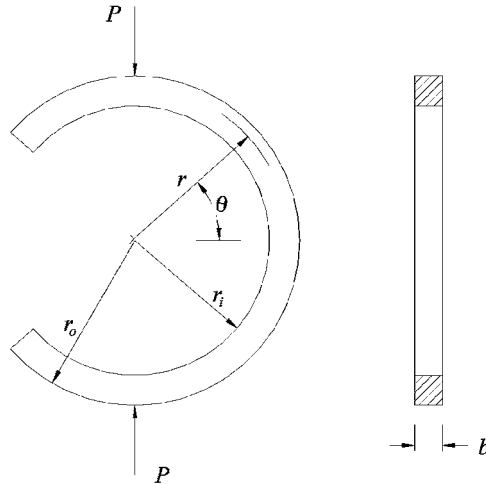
Typical Compression C-Ring Test Specimen Geometry
